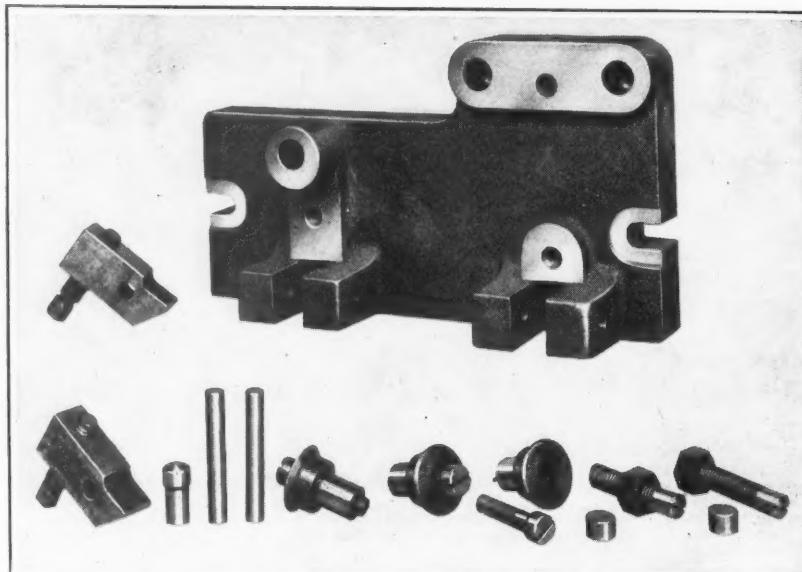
Disassembled View of Parts of Fixture shown assembled in Fig. 4, the Standard Details being shown in the Foreground
